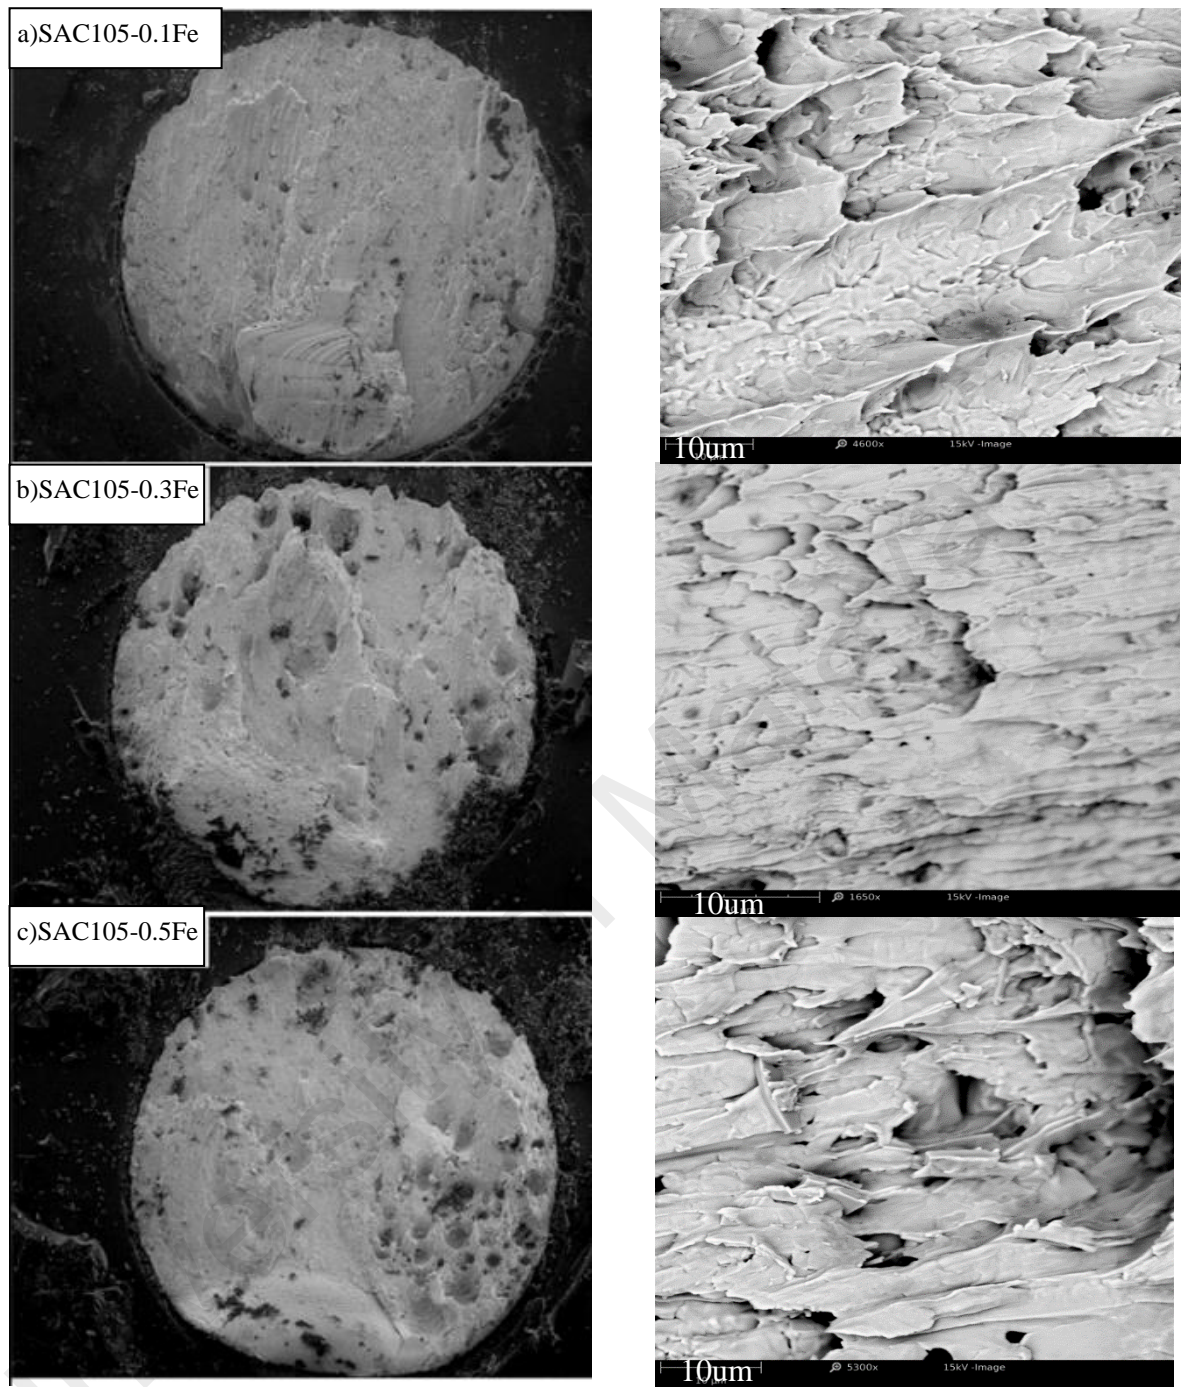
FESEM fractographs of the solder alloys after solder ball shear tests (a) SAC105-0.1Fe (b) SAC105-0.3Fe (c) SAC105-0.5Fe at 10 μm magnification
